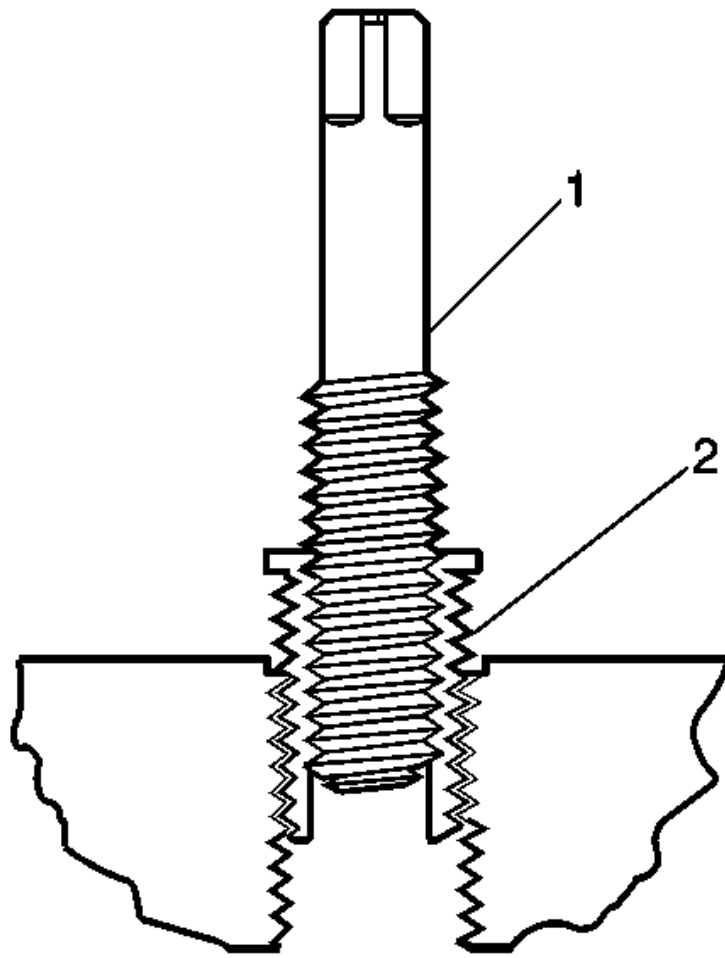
Installing Insert Into Bolt Hole Using Installer Tool
